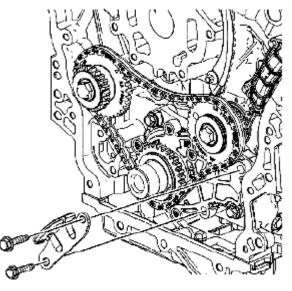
Aligning Timing Marks With Timing Camshaft Drive Chain Links Courtesy of SUZUKI OF AMERICA CORP.
